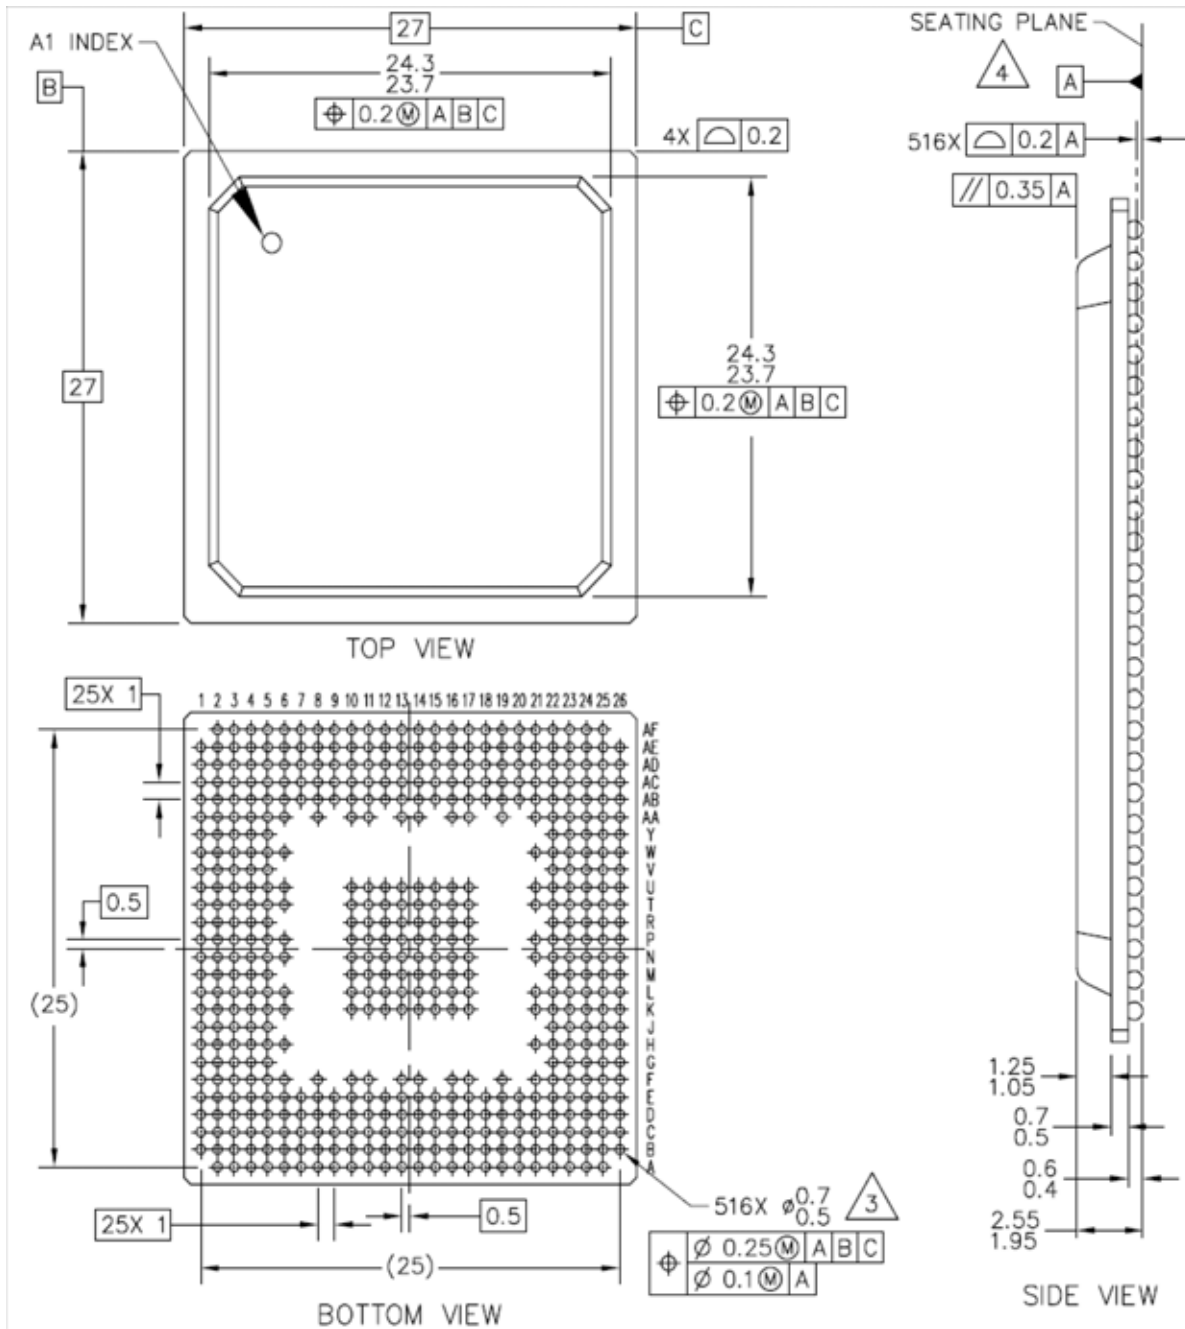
Mechanical Dimension and Bottom Surface Nomenclature of the MPC5121e/MPC5123 TEPBGA
